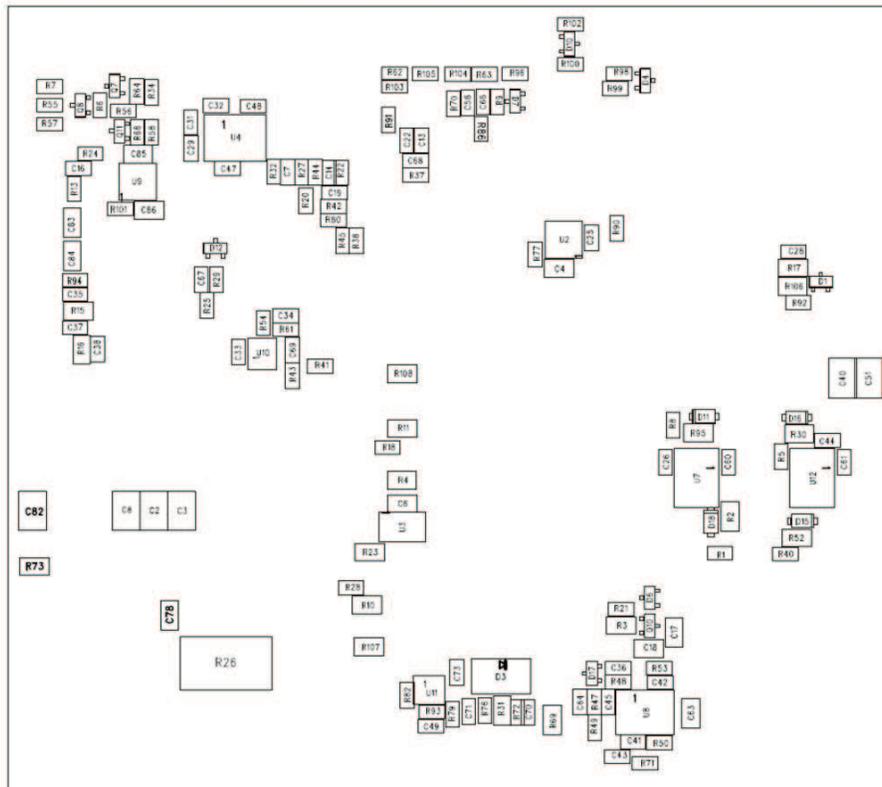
UCD3138HSFBEVM-029 Bottom Assembly Drawing (bottom view)
